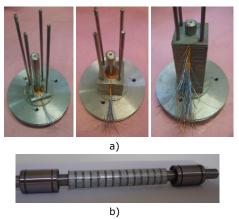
Prototype: a) Stator assembly. b) Linor with the bearings. Source: authors.
